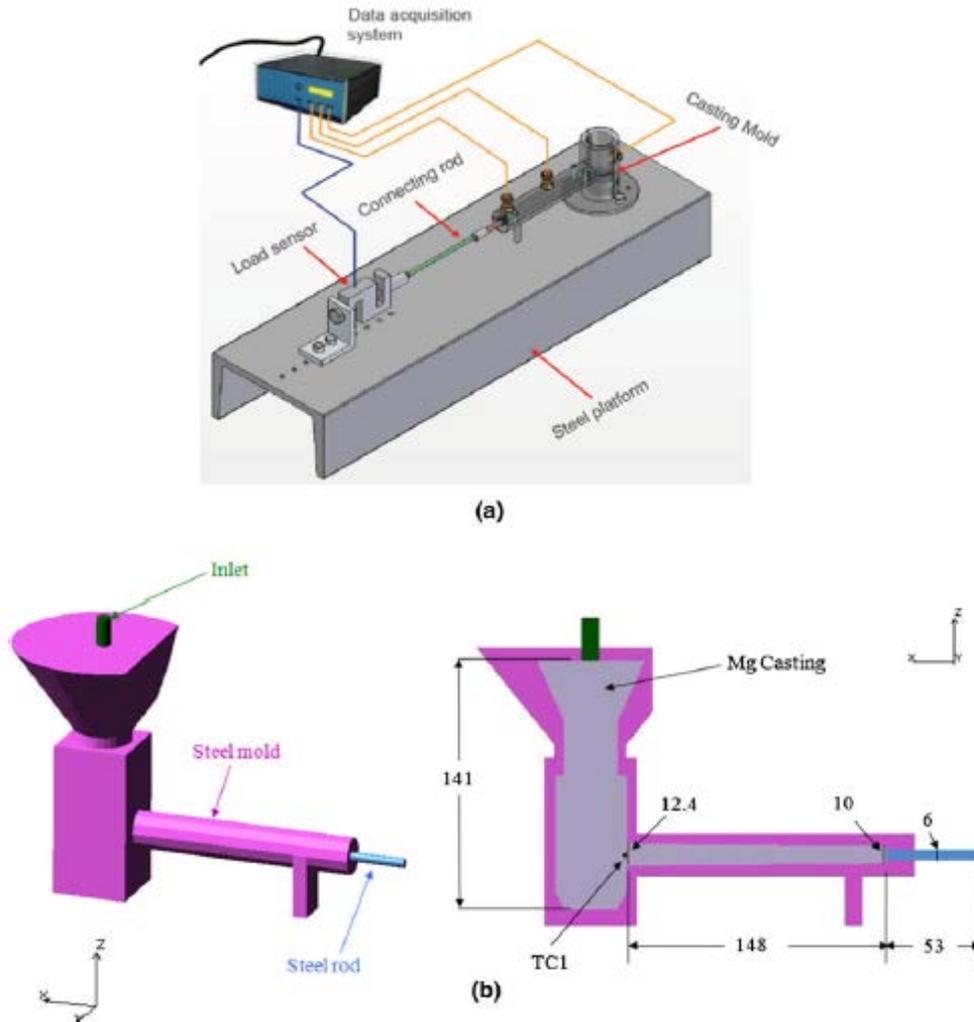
Experimental test setup: a) overall view and b) geometry of the casting and the mold as used in the simulations (all dimensions are in millimeters).
